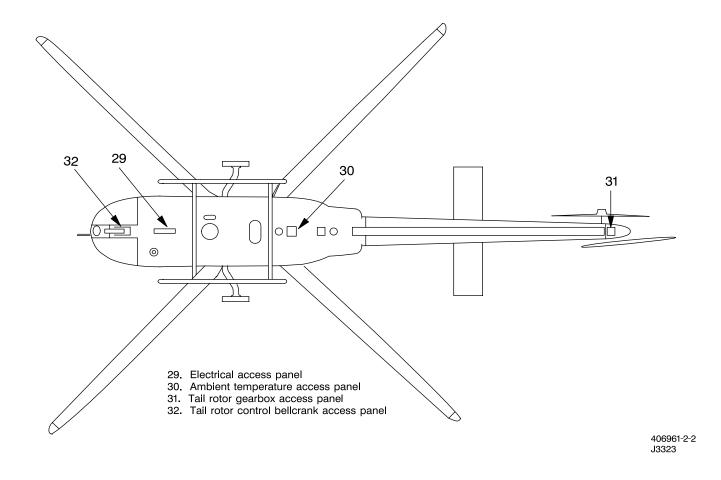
Access and Inspection Provisions (Sheet 2 of 2)
